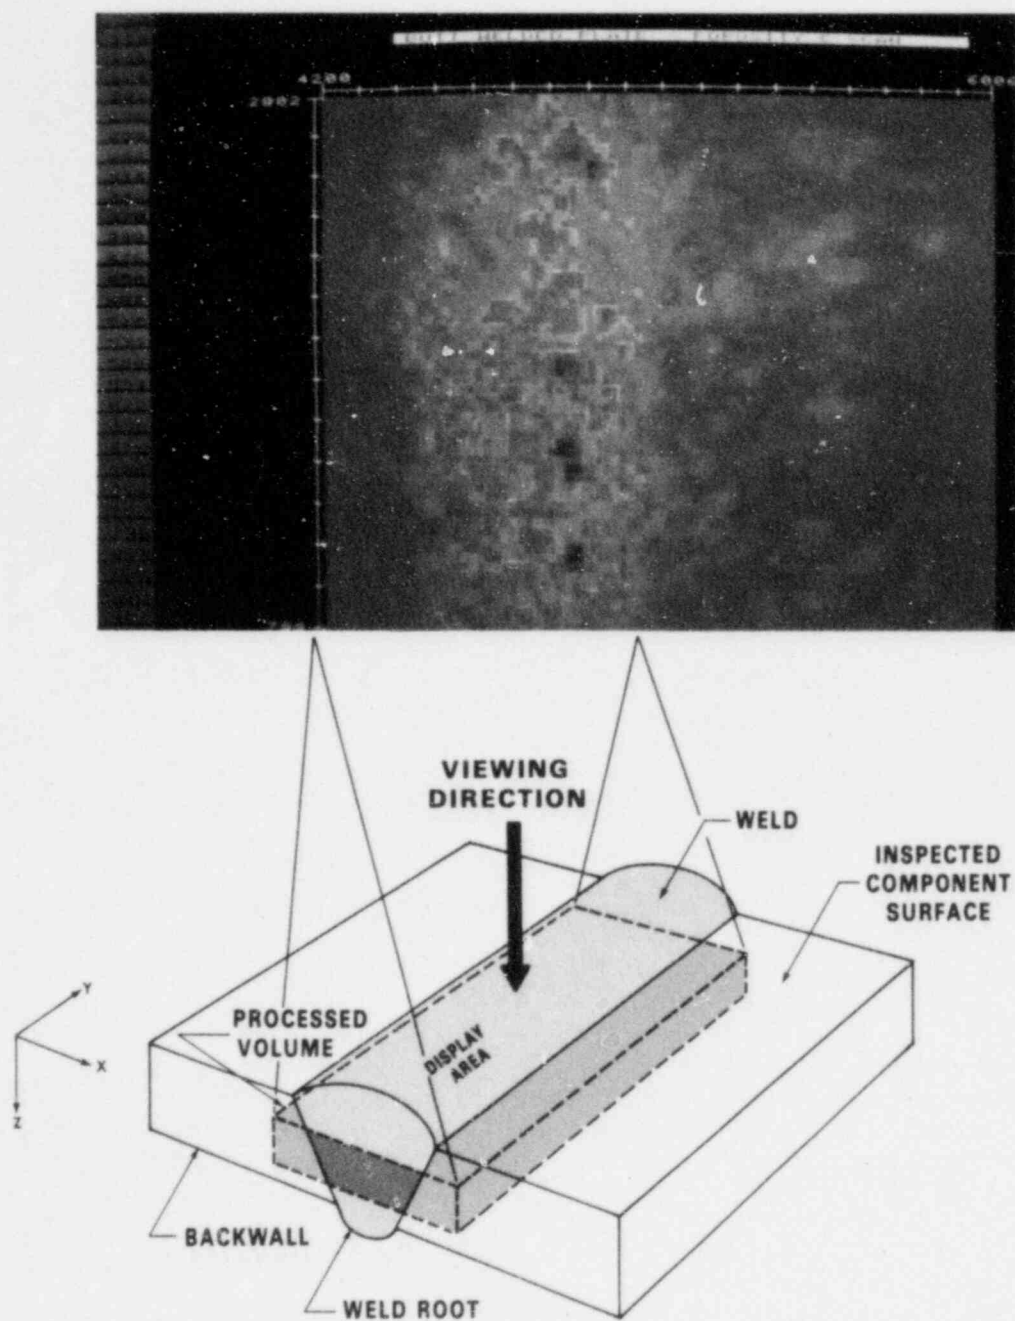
BUTT-WELDED CARBON STEEL PLATE SPECIMEN - POROSITY (C-Scan View)
